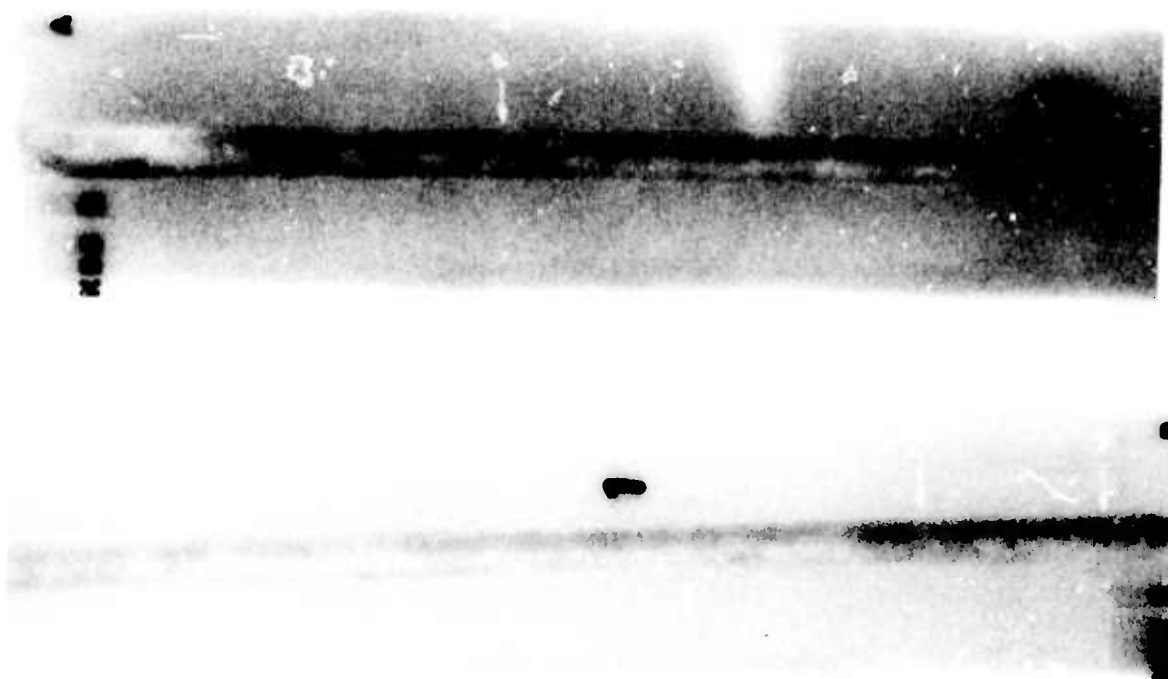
27 -Photographs of GTA weld radiographs
